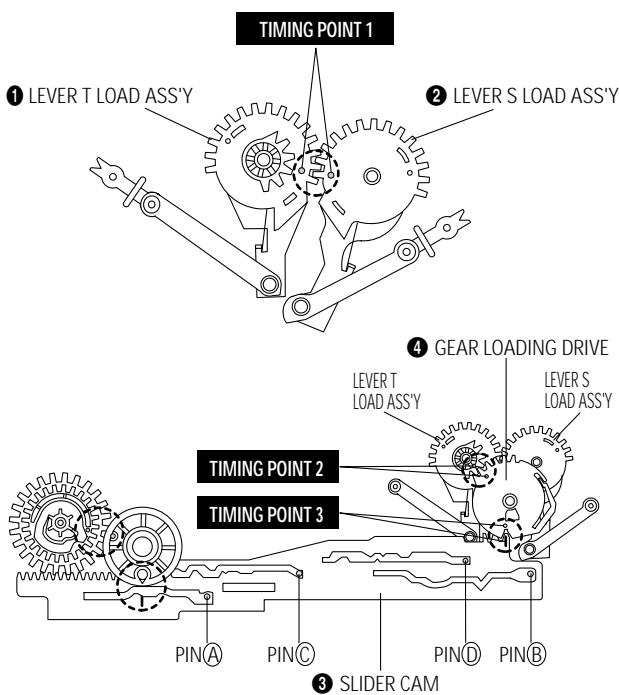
Assembly of Gear Loading Drive, Slider Cam, Lever T, S Load Ass'y
